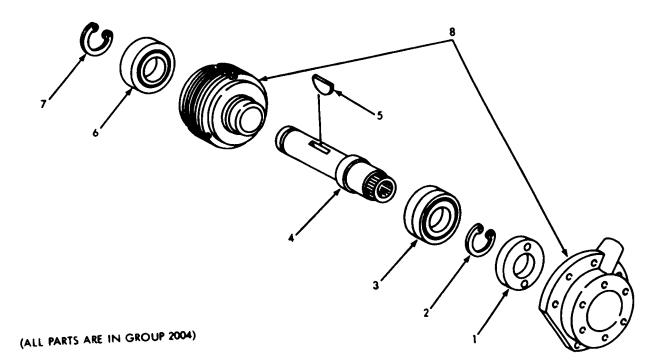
Power take-off assembly and mounting bracket-partial exploded view.
